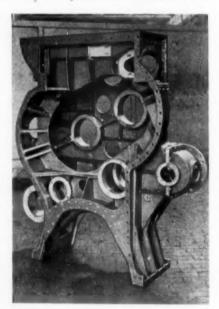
Gear casing and end housing assembly fabricated by arc welding at lower cost than would have been possible with conventional casting.
